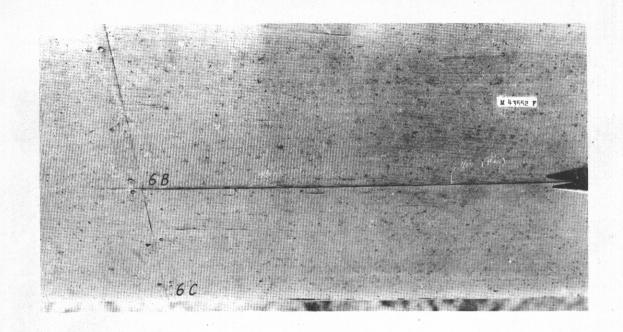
Cracks that appeared after 8 days of exposure. Both section 6B and 6C were made with Butacite 4644; 6B was pressed, whereas 6C is a bag molded leading edge.
